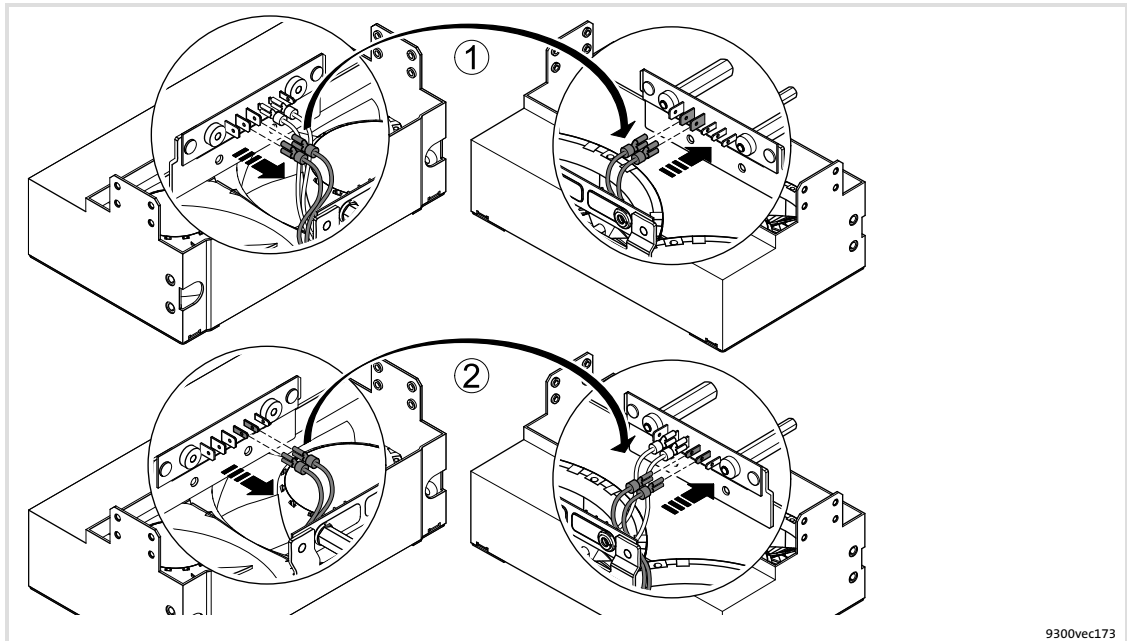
Plugging the fan connecting cable for the voltage supply to another terminal
